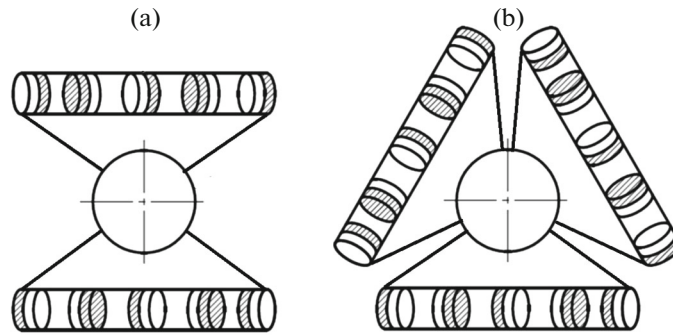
Attachment scheme of several dampers to a shaft (top view): (a) a body with two dampers and (b) a body with three dampers.
